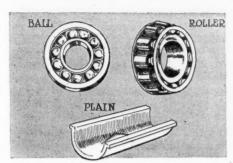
BALL, ROLLER AND PLAIN BEARINGS
